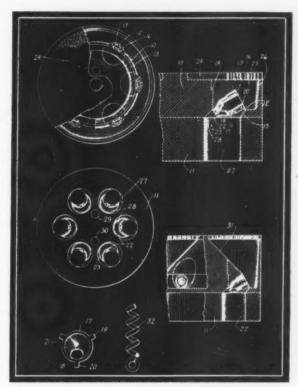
The die for making macaroni in this machine was held patentable because its design was beyond the imagination of an ordinary skilled mechanic
